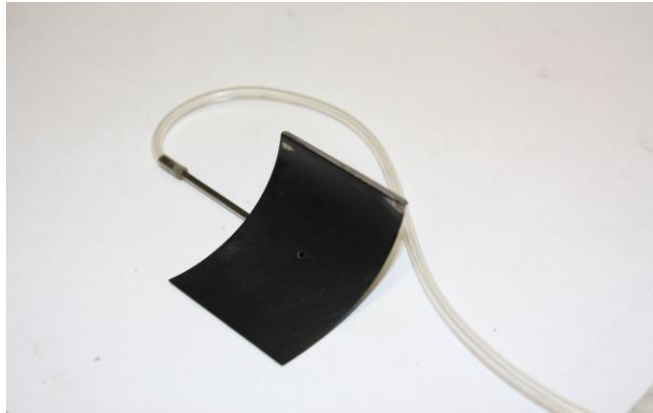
Front bearing top foil showing rubbing marks at the edges
